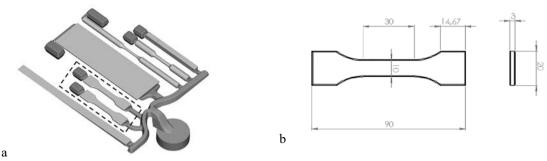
(a) Geometry of the die casting, the investigated specimens are indicated by the dashed line rectangle; (b) technical design of the tensile specimen.
